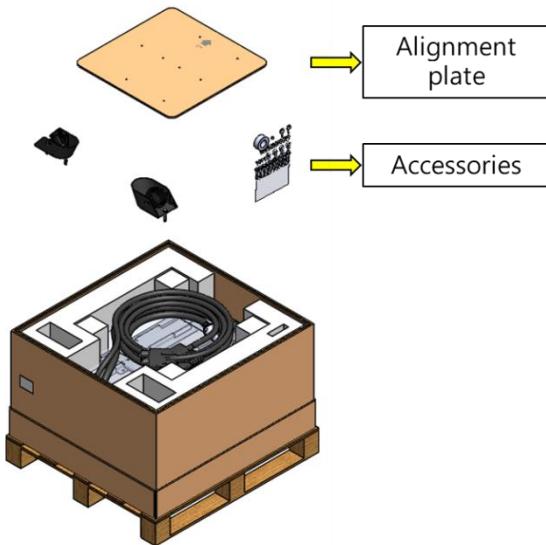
Take Out the Pad, Accessories and Upper EPE
